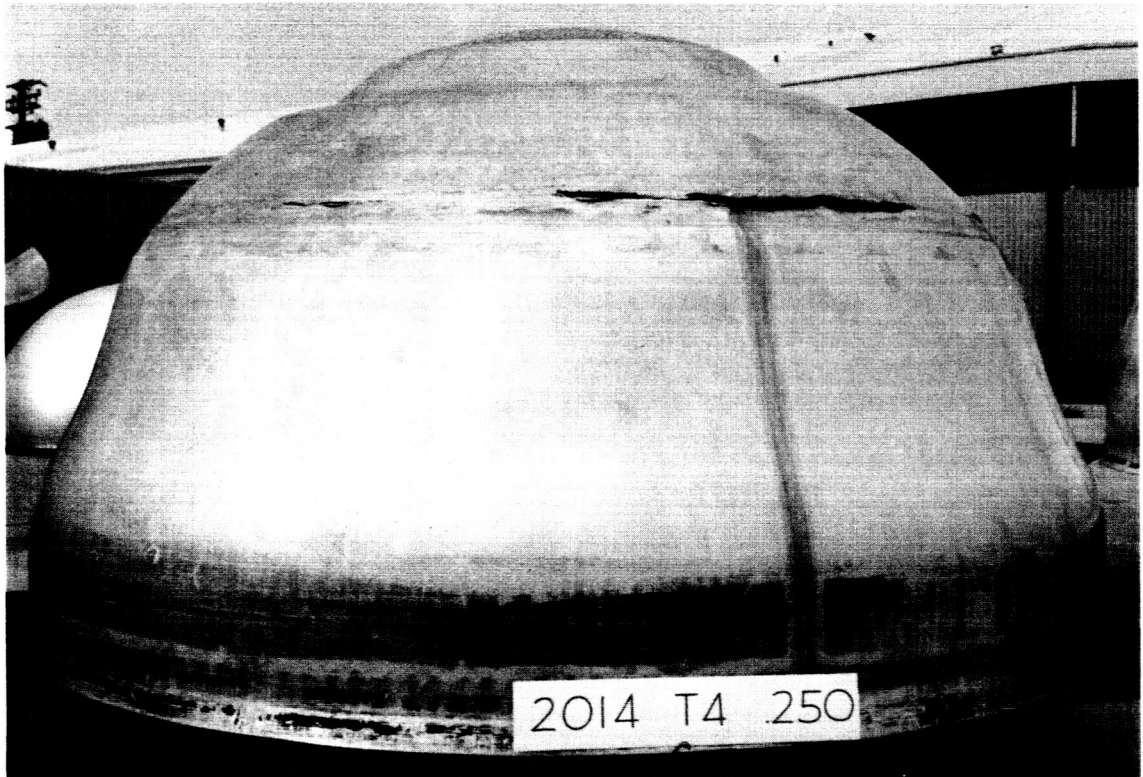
Figure IX Bulkhead No. 2 - Showing Circumferential Failure and Sound Longitudinal Weld. Approximately 65% Formed.
